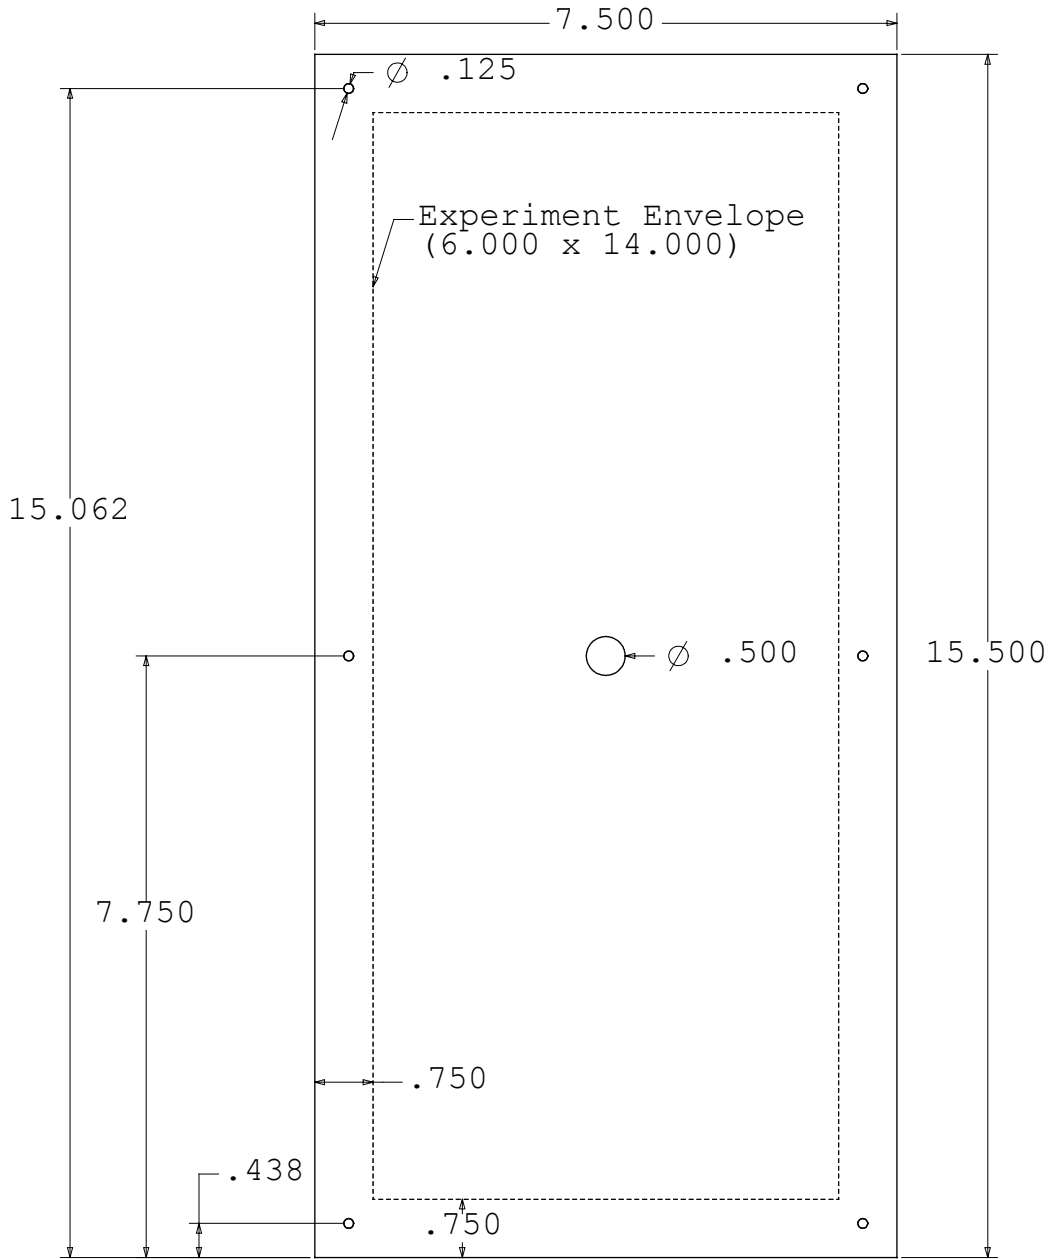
Dimensional Drawing of Carrier Plate for Footprint #6
